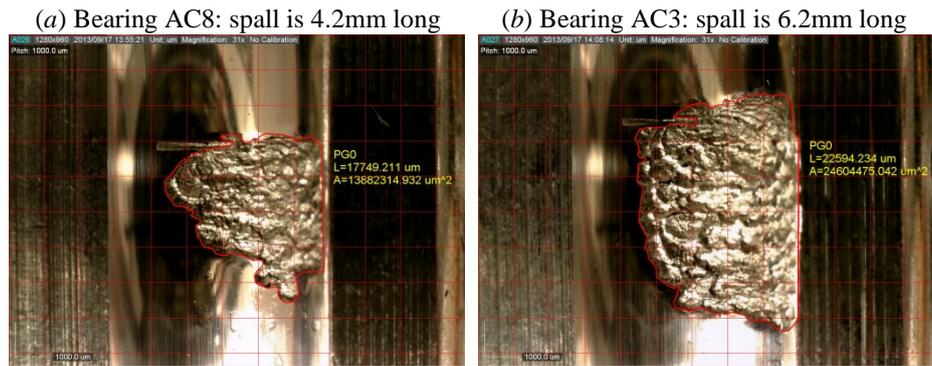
Pictures of the spalls on the inner race of Bearings AC8 & AC3
